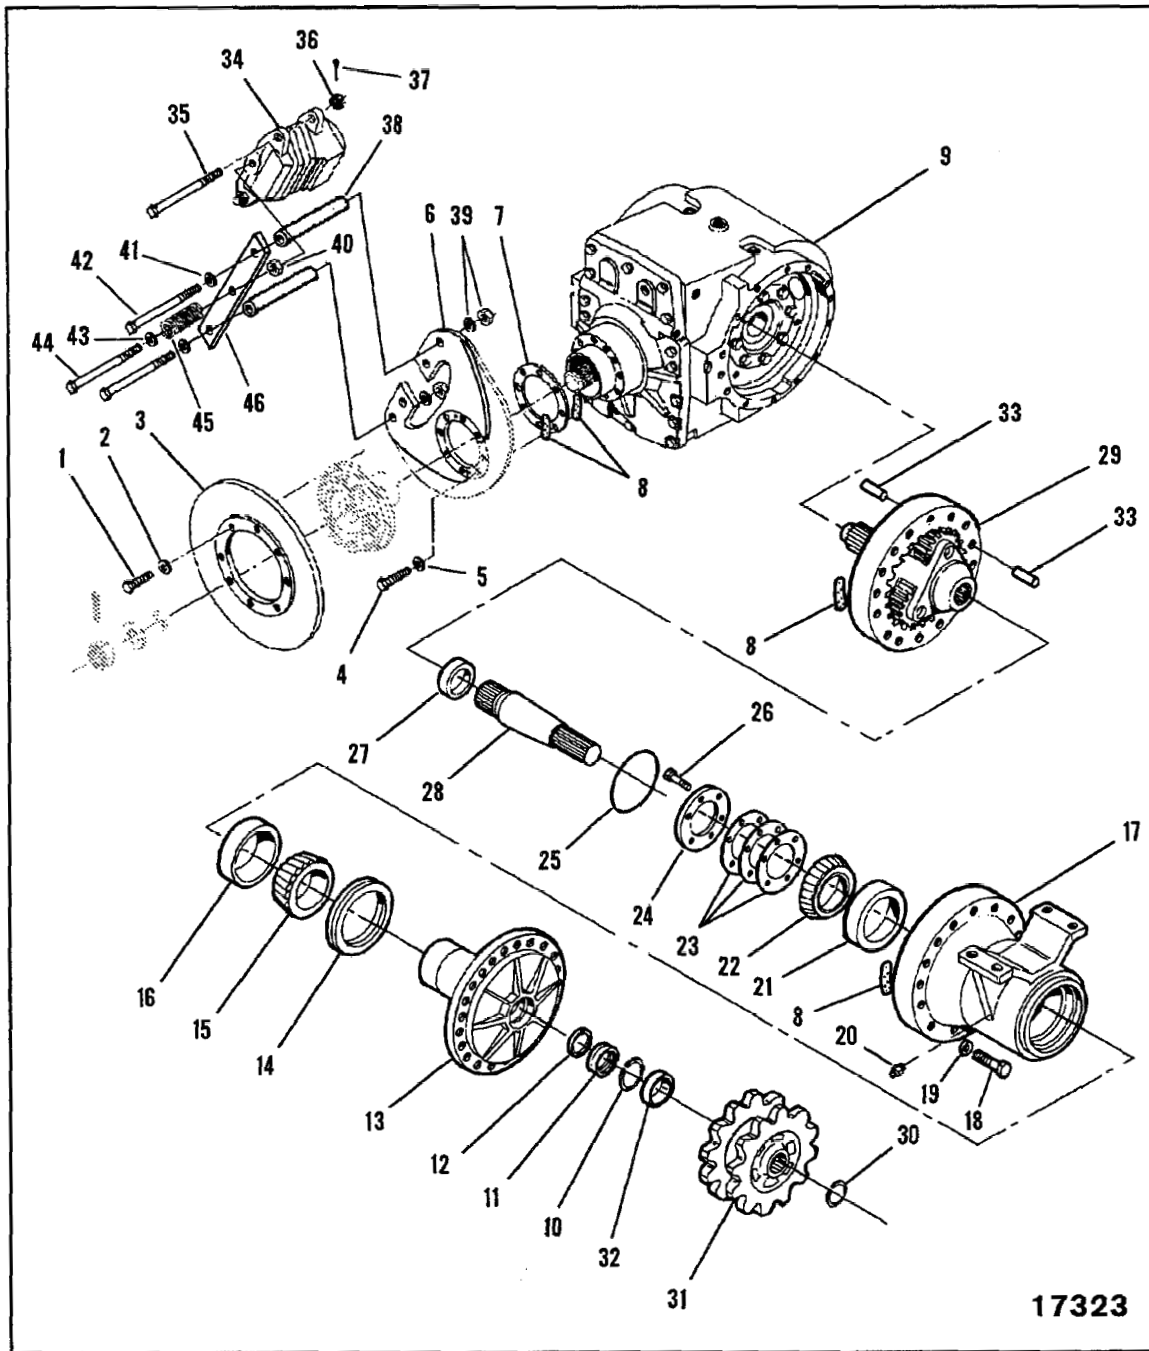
EXPLODED VIEW OF FINAL DRIVE WITH PLANETARY REDUCTION AND PERROT PARKING BRAKE (FOR MICO PARKING BRAKE SEE PARTS MANUAL)
